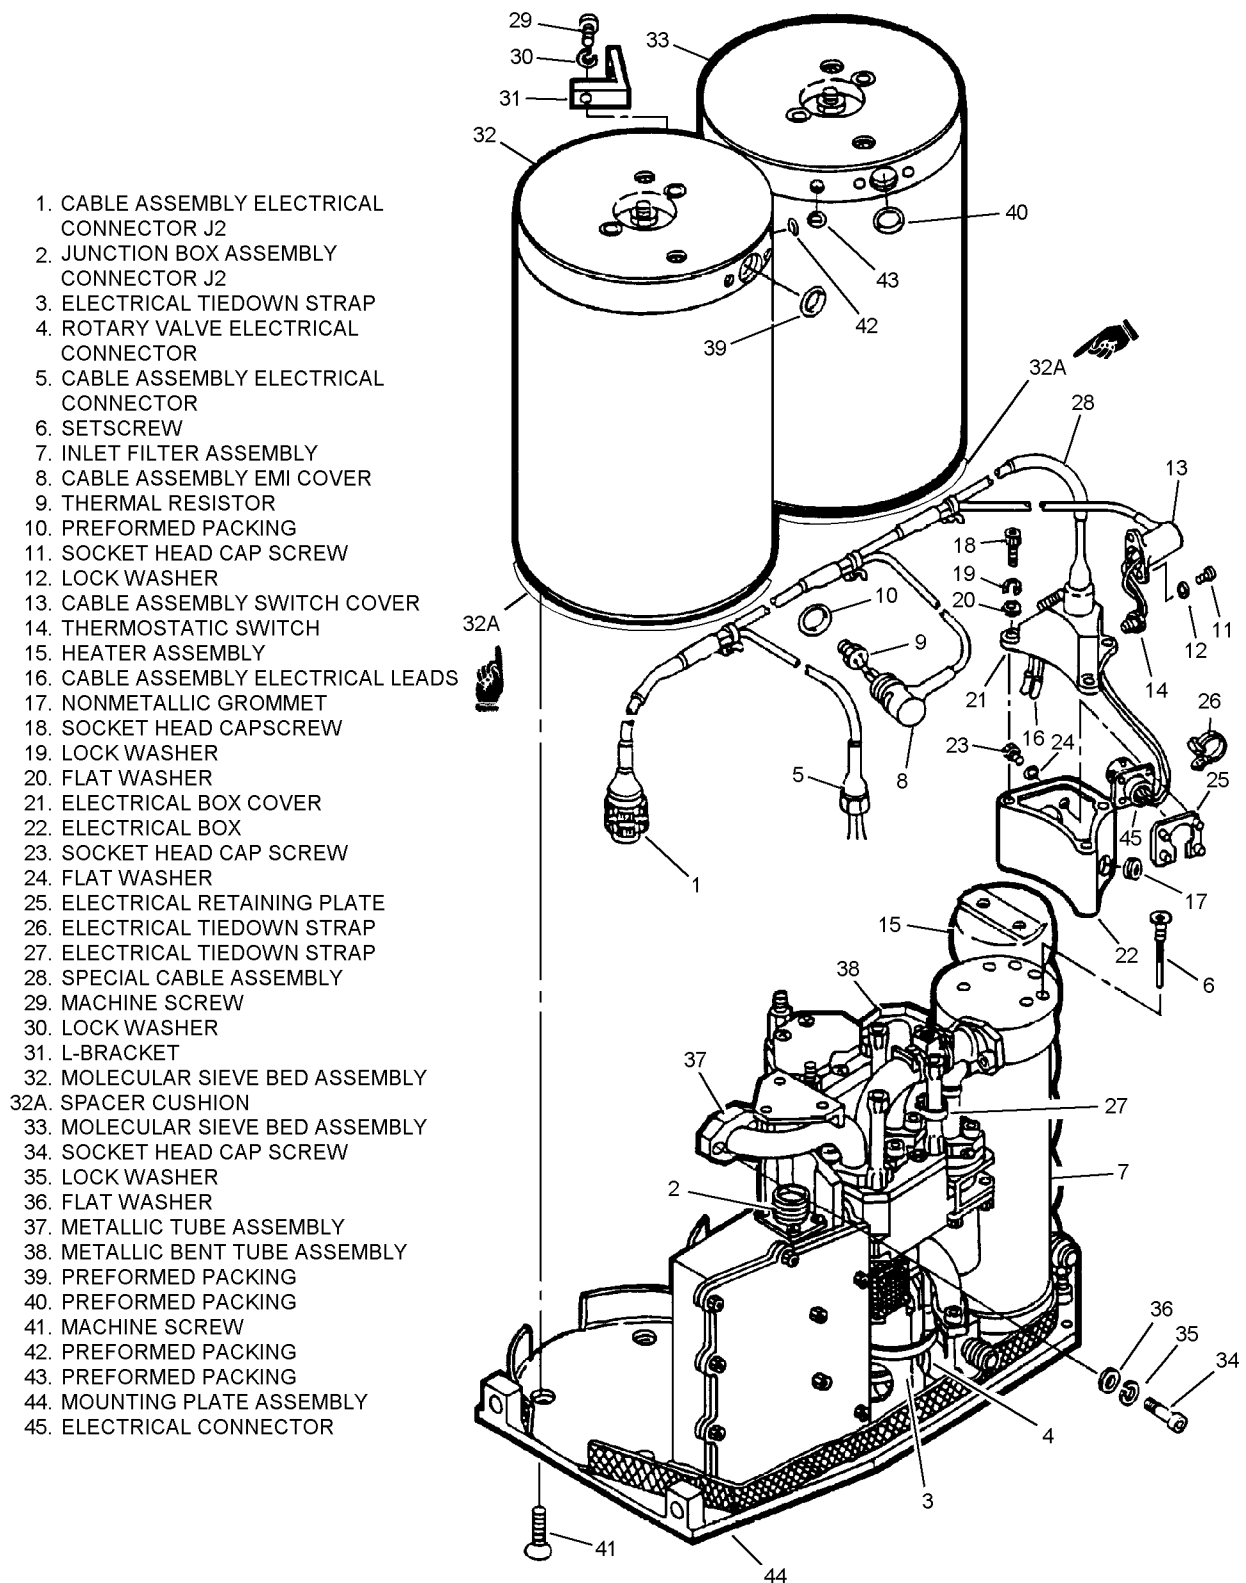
Special Cable Assembly/Sieve Bed Removal/Assembly
